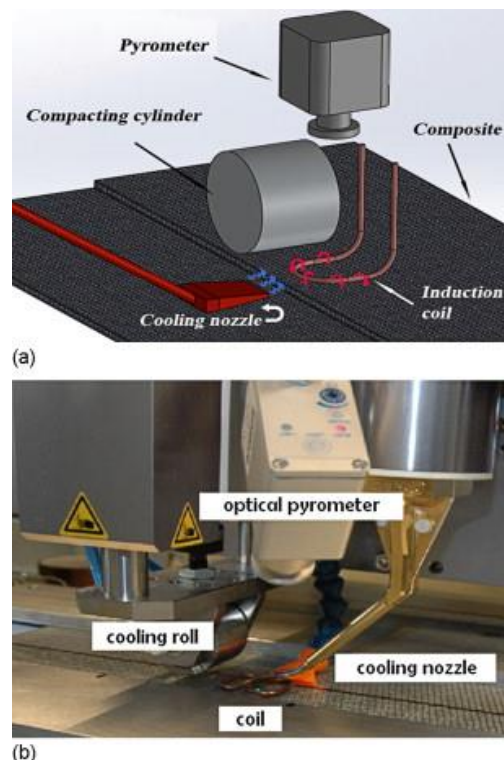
Induction welding (a) representation of the induction welding equipment; (b) picture of the welding head
